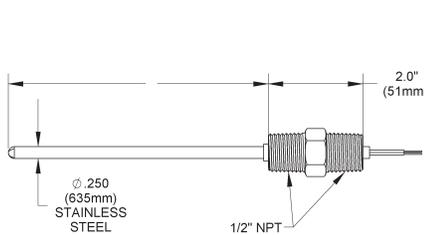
Double Threaded Stainless Steel Immersion Probe Only
